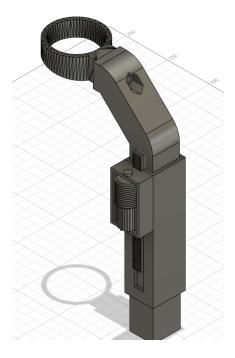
CAD design of the microscope arm, including worm gear mechanism.
